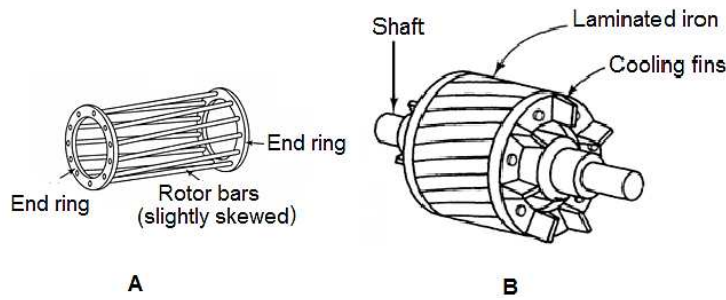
Squirrel-cage rotor: (A) cage construction; (B) assembled [71]
